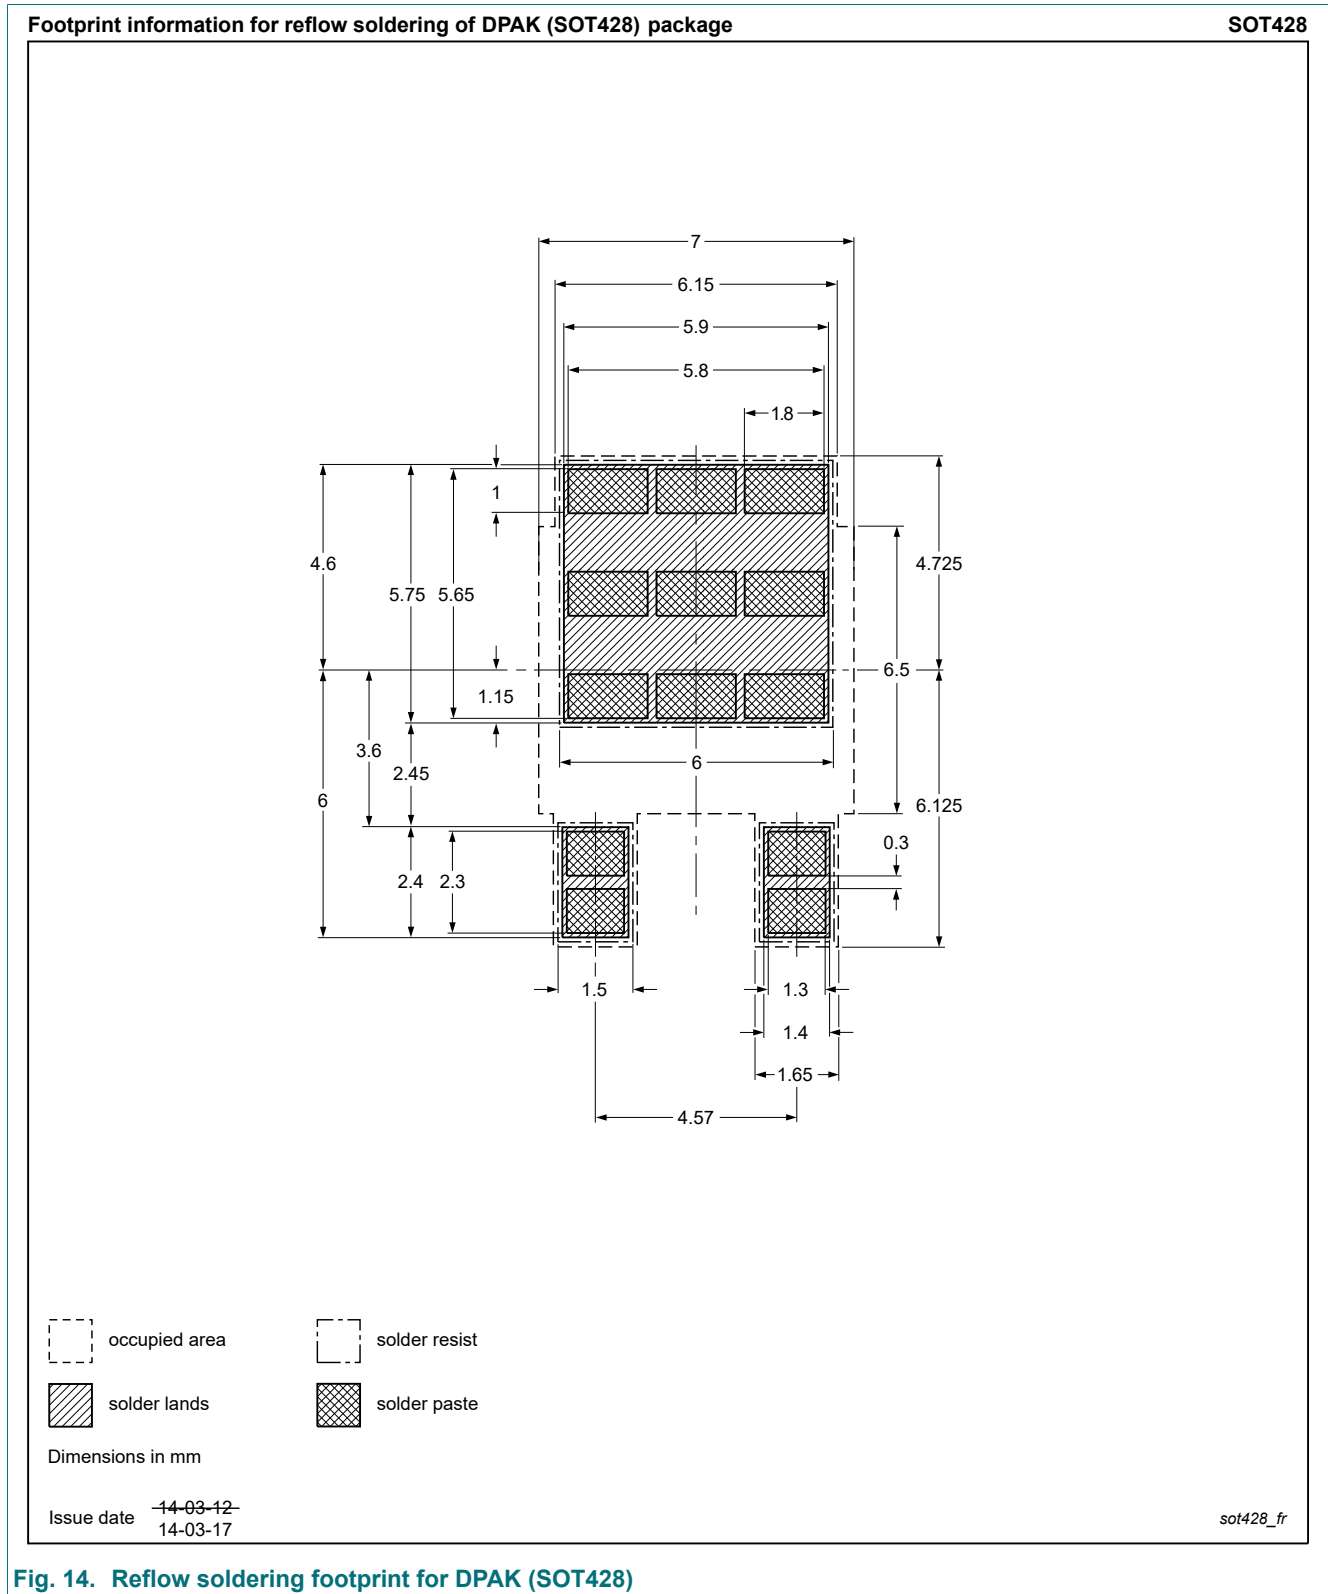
Reflow soldering footprint for DPAK (SOT428)
